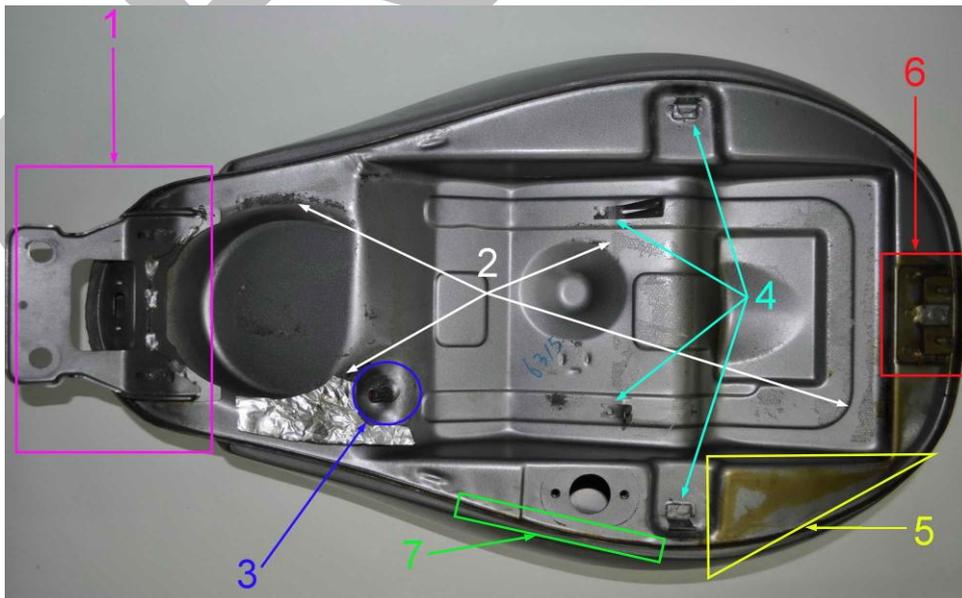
General aspect of the fuel tank; Bottom view of the tank.
